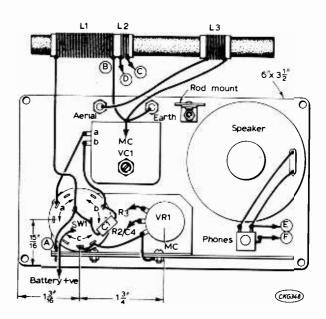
The component wiring on the reverse of the front panel, together with details of the coil connections.
